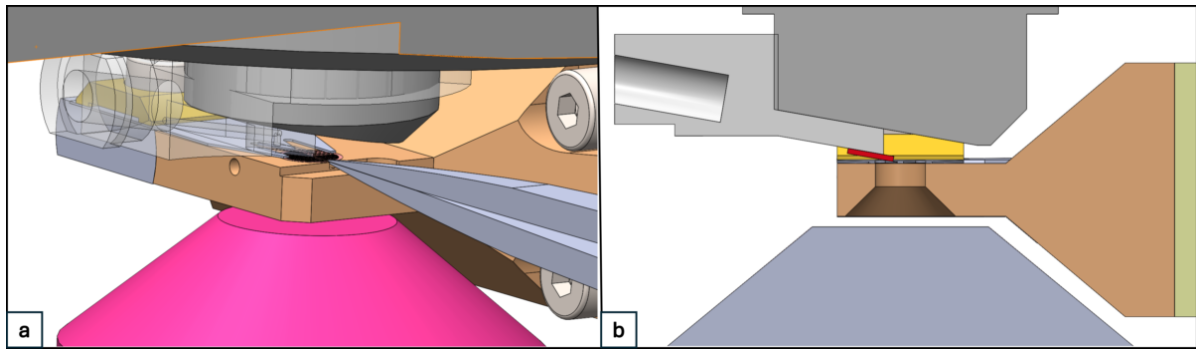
a. Isometric view of the grid holder between AFM and microscope objective. b. Section view of the grid holder between AFM and microscope objective to illustrate the clearance around the grid clip.
